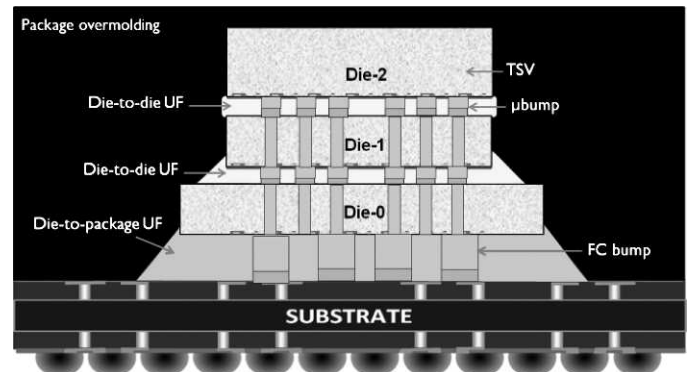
Typical stack-up in the case of BGA package with multi-die stack.
